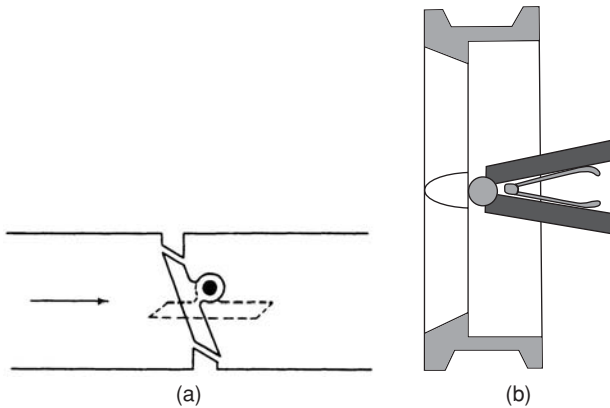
(a) Tilting-disk check valve. (b) Dual-plate check valve.
